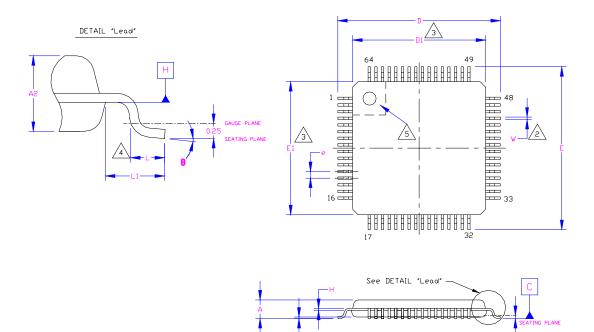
64 Pin STQFP Package Outline, 7x7x1.4 Body, 2 mm Footprint
